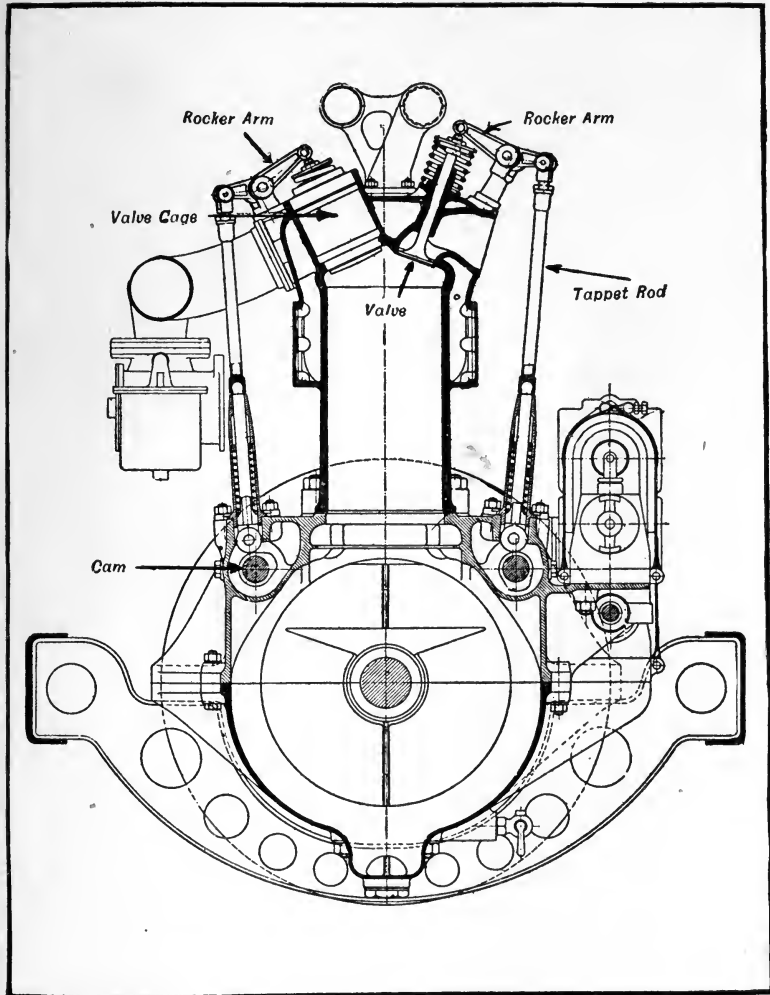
Benz Racing Motor, Presented to Show Method of Valve Placing so these Members Open Directly into the Cylinder Head.
